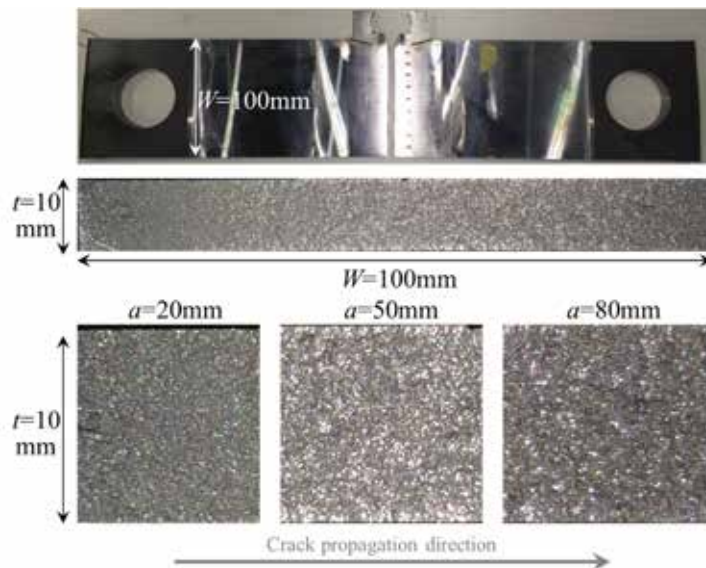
Fracture appearance and fracture surface after SENT test
